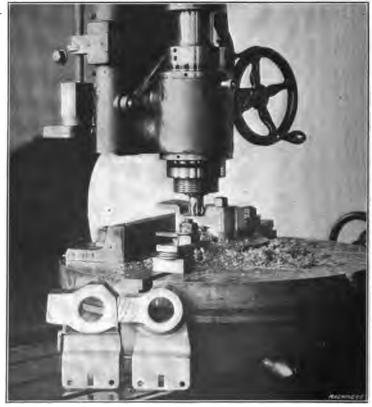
Finishing a Circular Fillet with a Rose Milling Cutter
